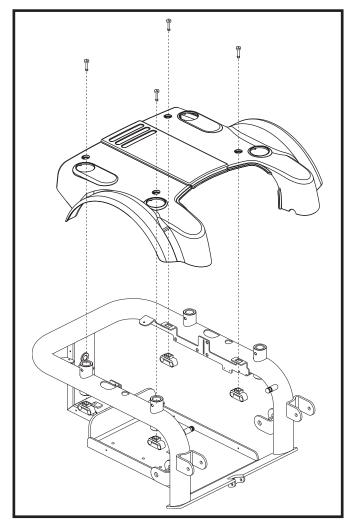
Jazzy 1121 Shroud Assembly/Disassembly
